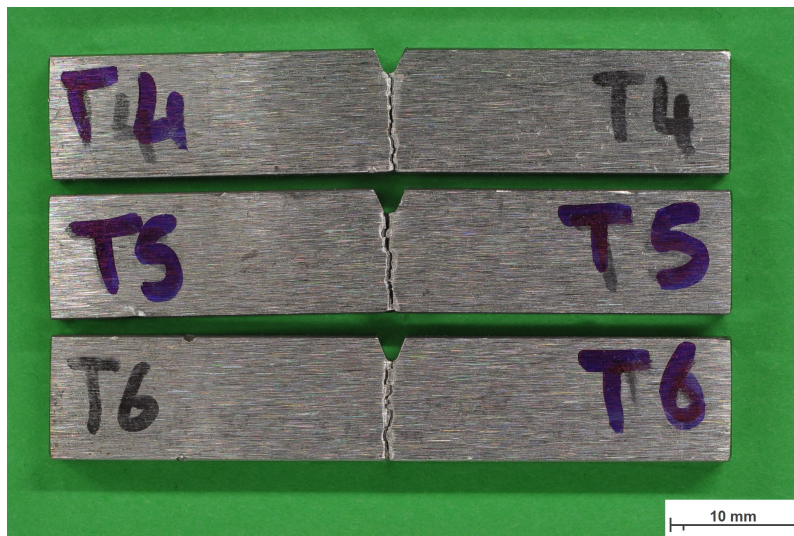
Butt weld EBLPWHT (T) Charpy V-notch samples after applying impact test at -40°C .
